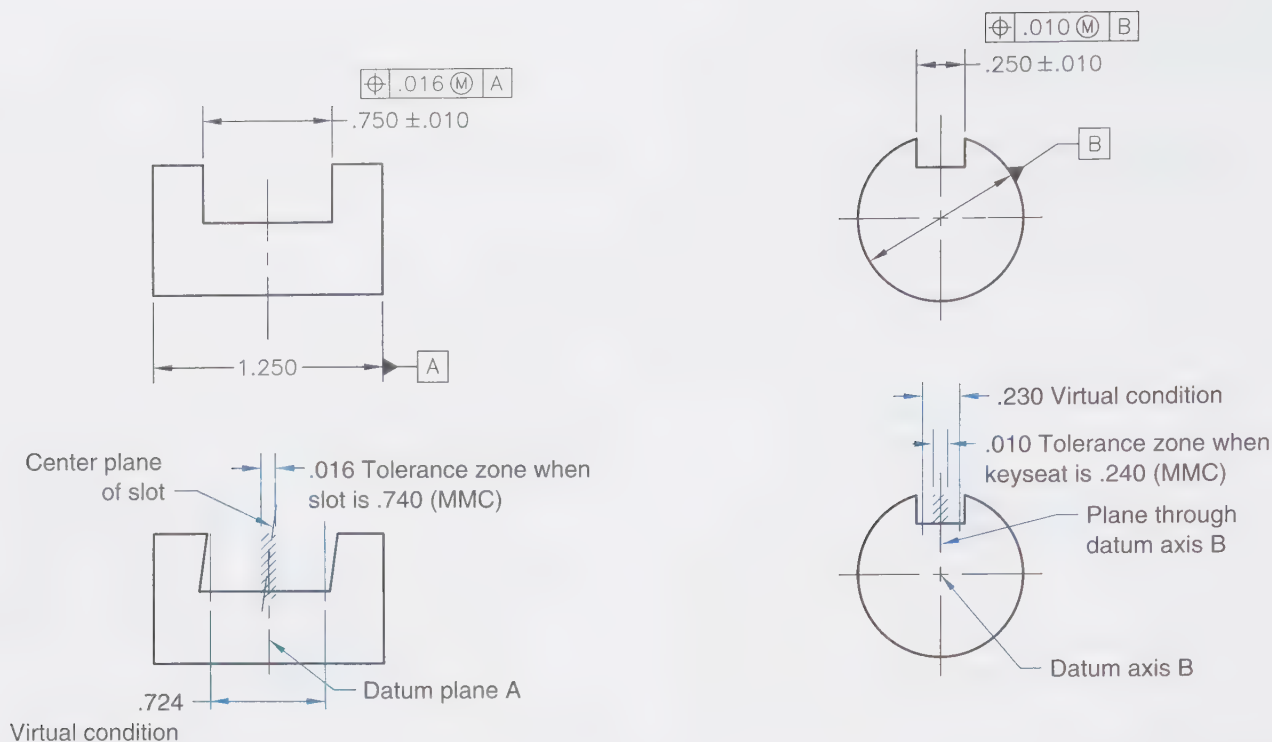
A position tolerance applied to a rectangular feature of size creates a rectangular tolerance zone that controls the location of the feature's center plane.
